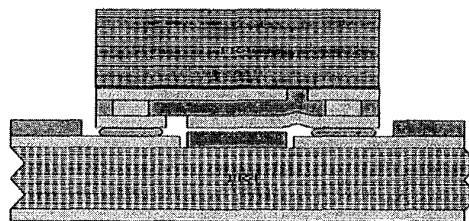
Prototype Board with FR4 Core Board with mapped SMT discrete valued components.
